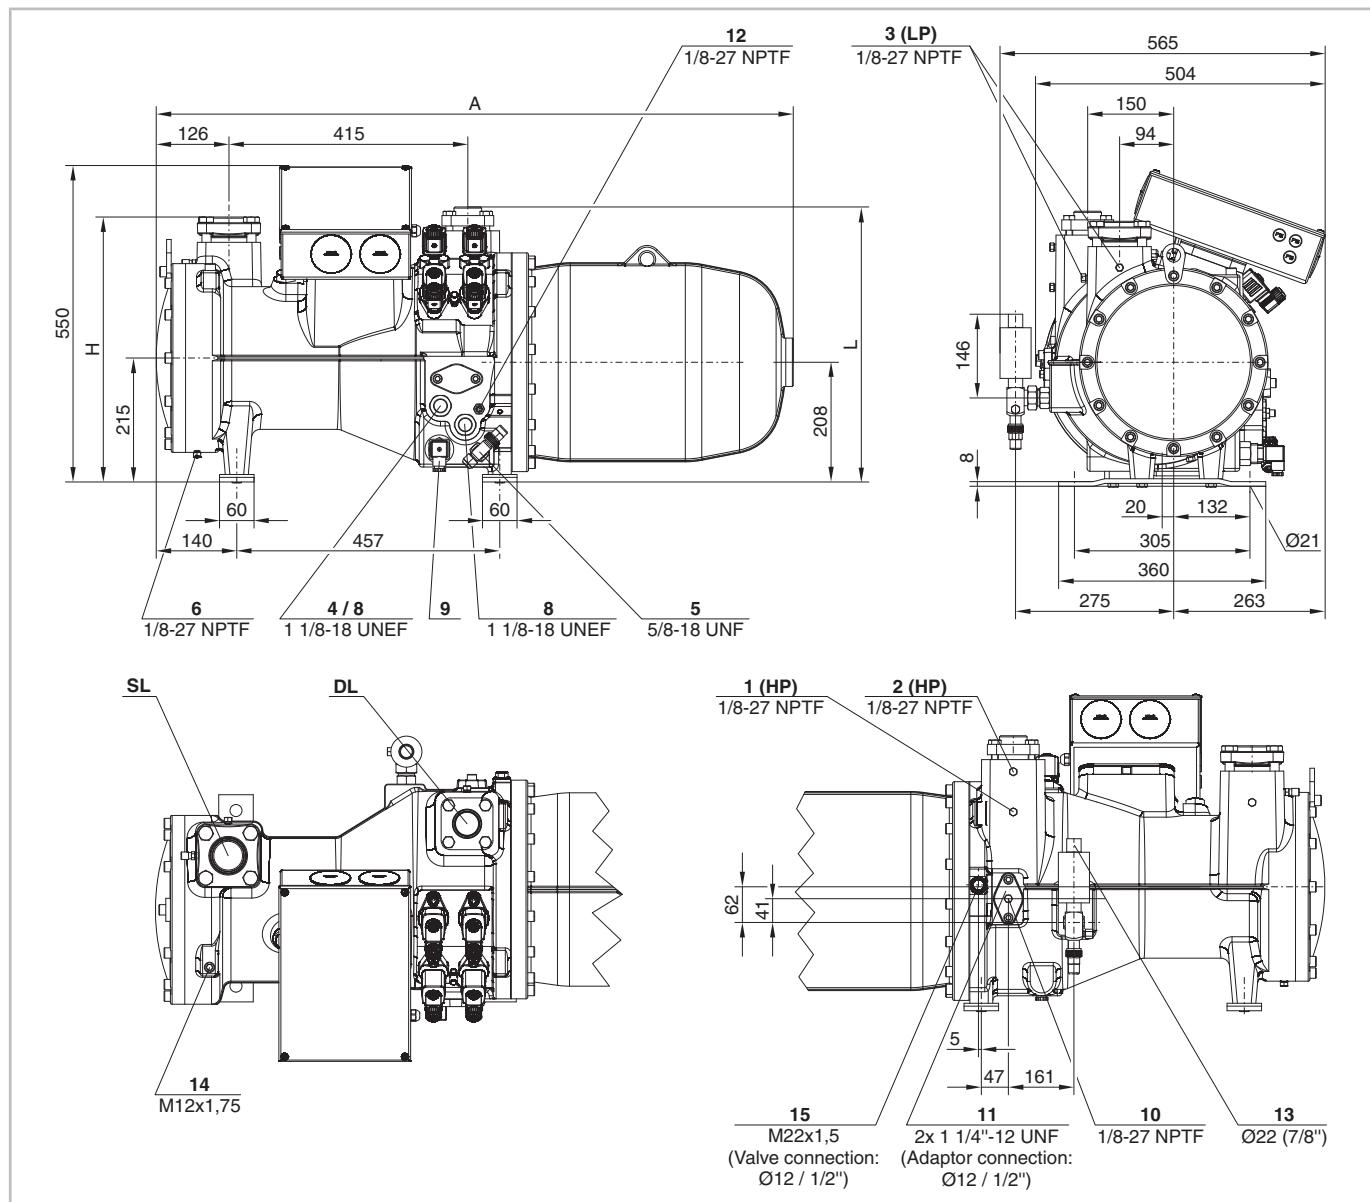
Dimensional drawing CSH6553-35Y .. CSH6593-60Y
